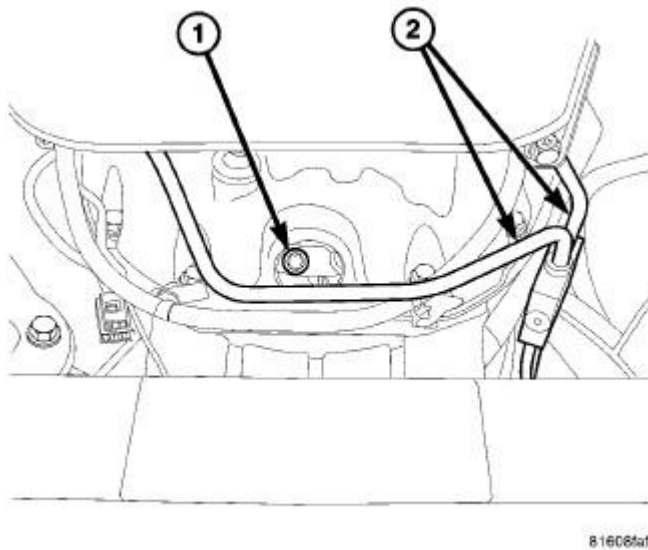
TORQUE CONVERTER TO FLEX PLATE BOLTS
